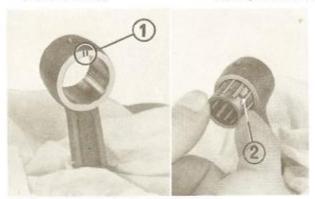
(1) Connecting rod small end I.D. identification mark (2) Small end bearing
